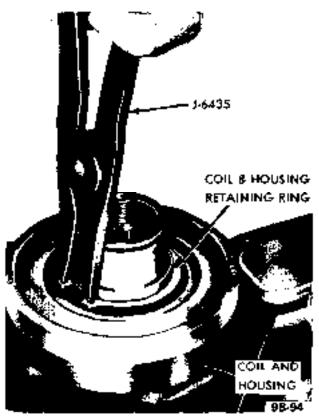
B-120 Removing or Installing Coil and Housing Retainer Ring
